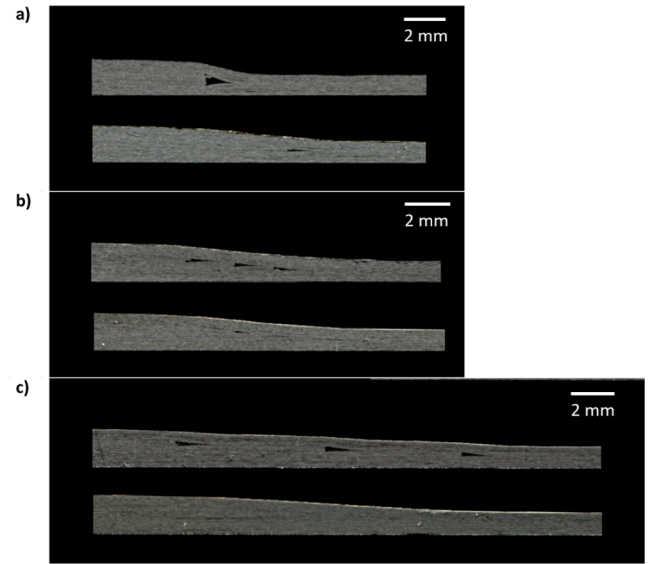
Cross sectional images of the test specimens, with conventional ply drops on top and scarfed plies bottom: (a) 0 mm ply drop spacing, (b) 2 mm ply drop spacing, and (c) 5 mm ply drop spacing.
